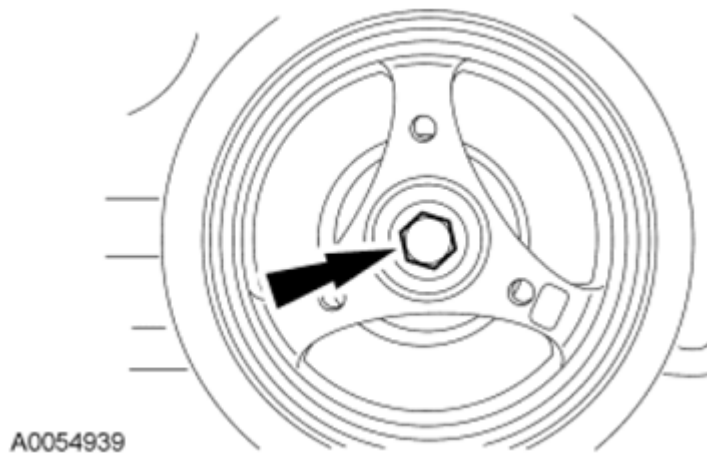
Locating Bolts And Coolant Pump Pulley
